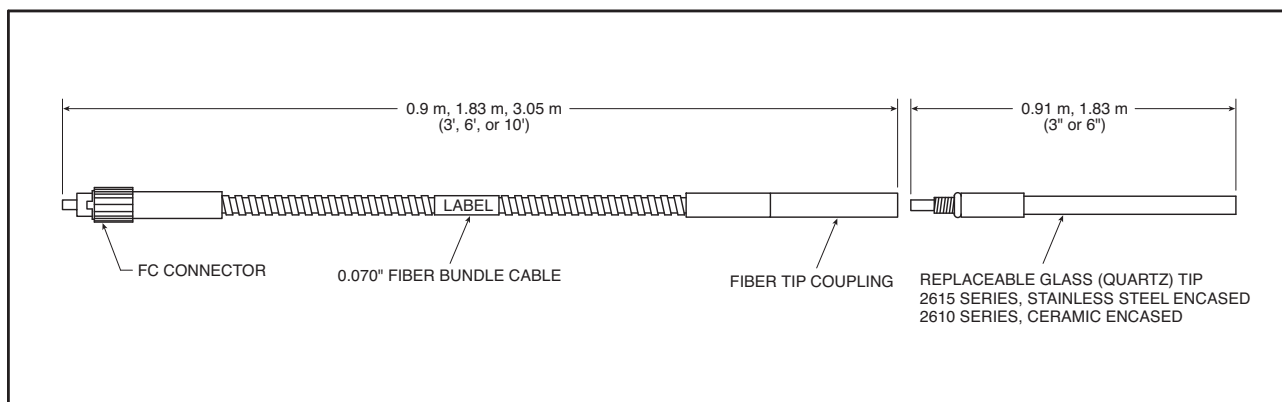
Glass or Quartz Tip Fiber Cable Assembly
